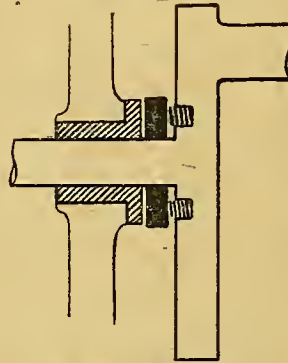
The special crankshaft bearing and hardened steel ring to render the crank chamber gas tight.
